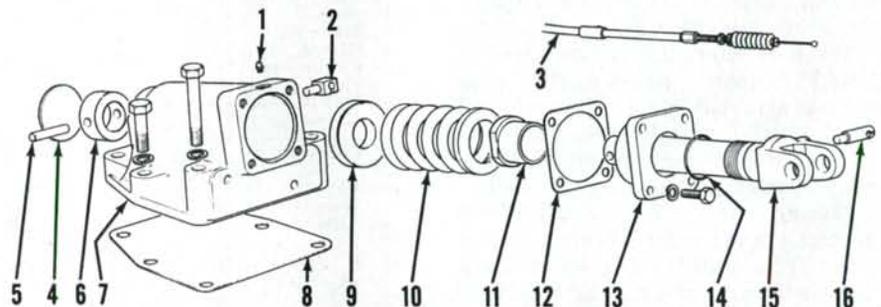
Exploded view of single rate draft sensing unit used on some models.
